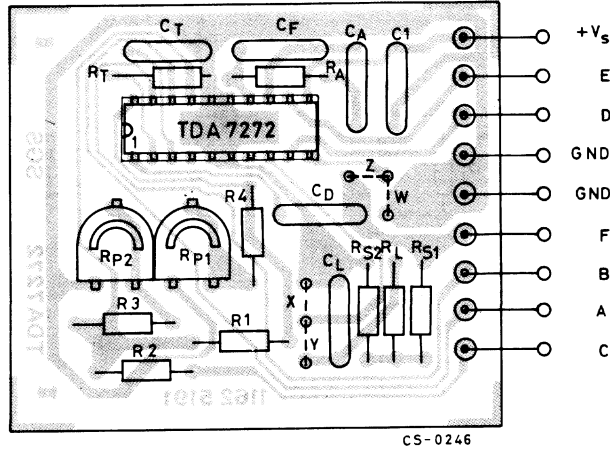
P.C. board and components layout of the circuits of Fig. 20, 21, 22
